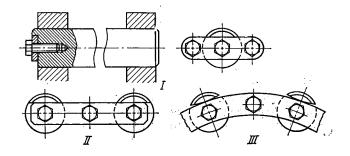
Pivot pins fixed against axial and angular displacements by end plates
